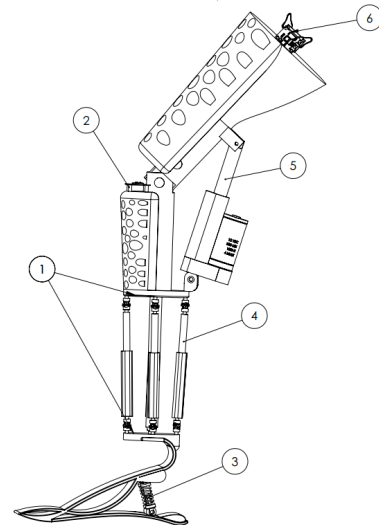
Mechanical design of the lower limb prosthesis prototype.
